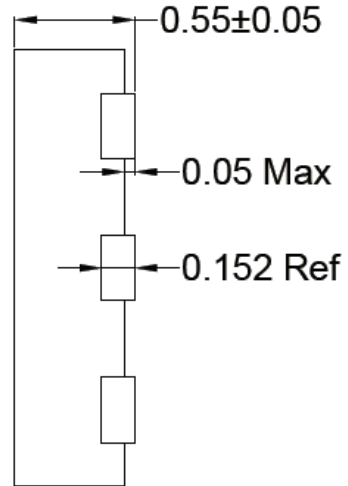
(b). PCB Layout Suggestion (SQ24201E1ABT)
